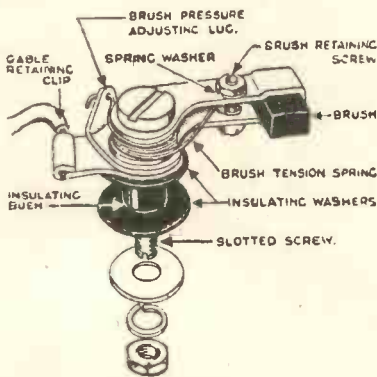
THE BRUSH ASSEMBLY OF THE 521 D.C. MOTOR.
